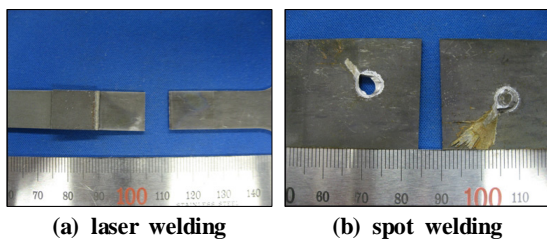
Fracture location of tensile-shear test specimen according to welding methods.
